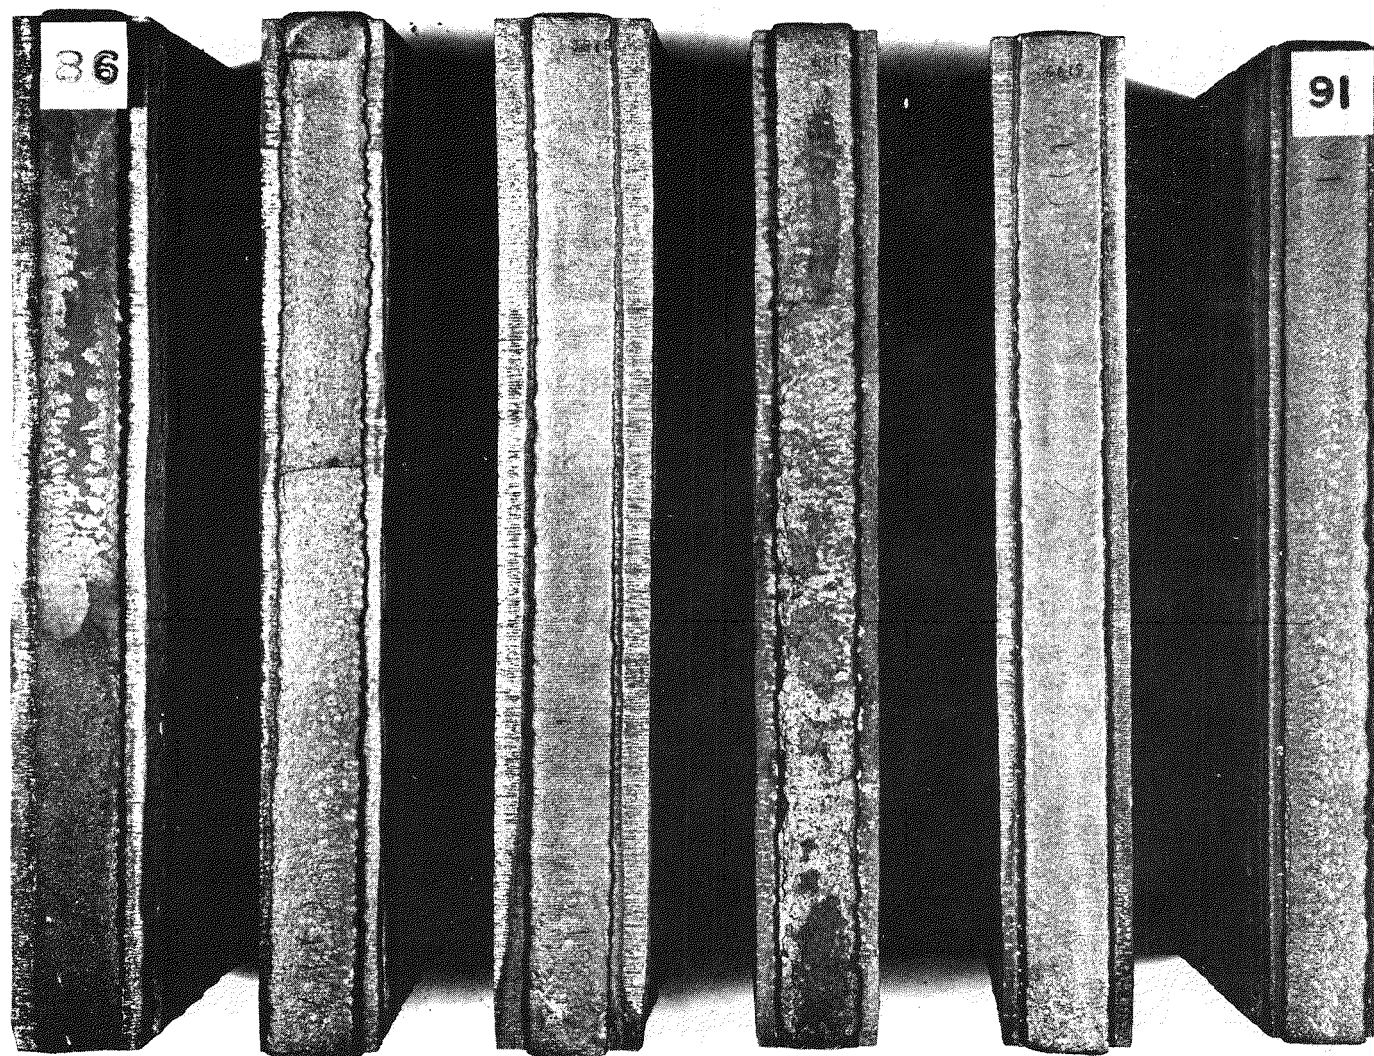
Edge view of 309-304L weldments after exposure.
